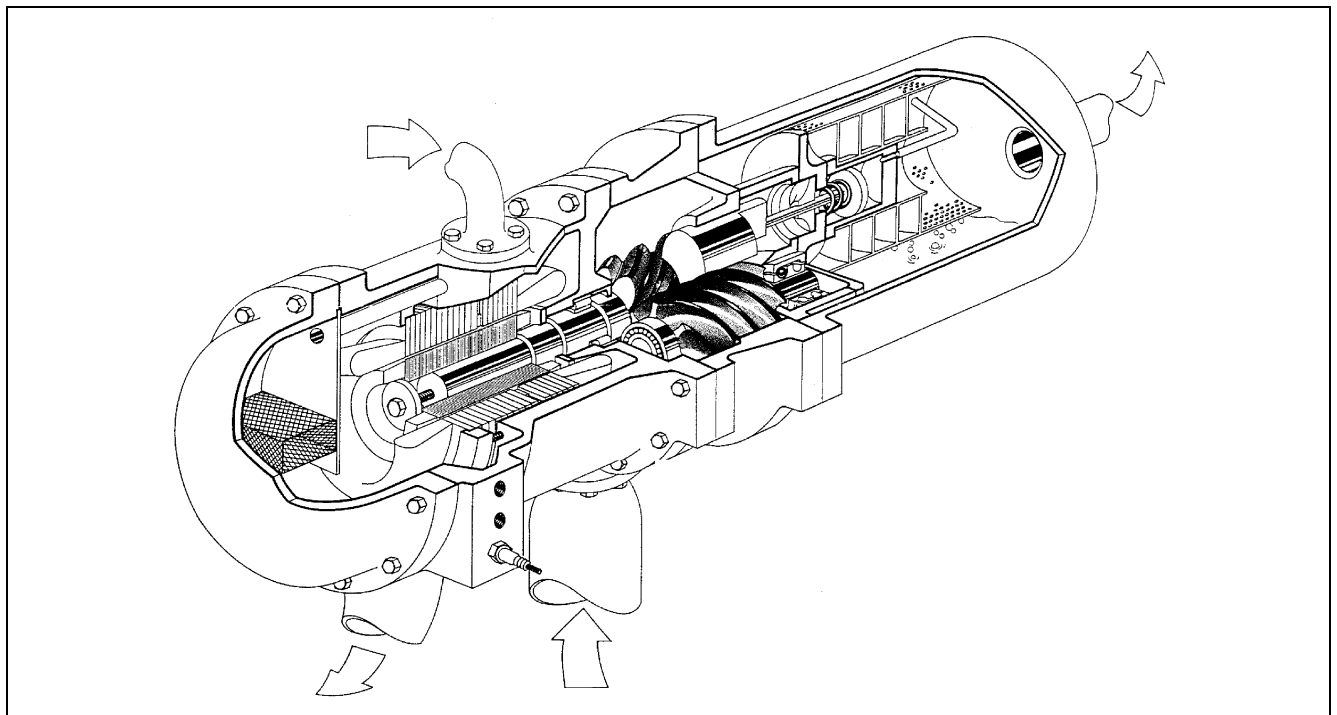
Semihermetic Twin-Screw Compressor with Motor Housing Used as Economizer; Built-In Oil Separator
